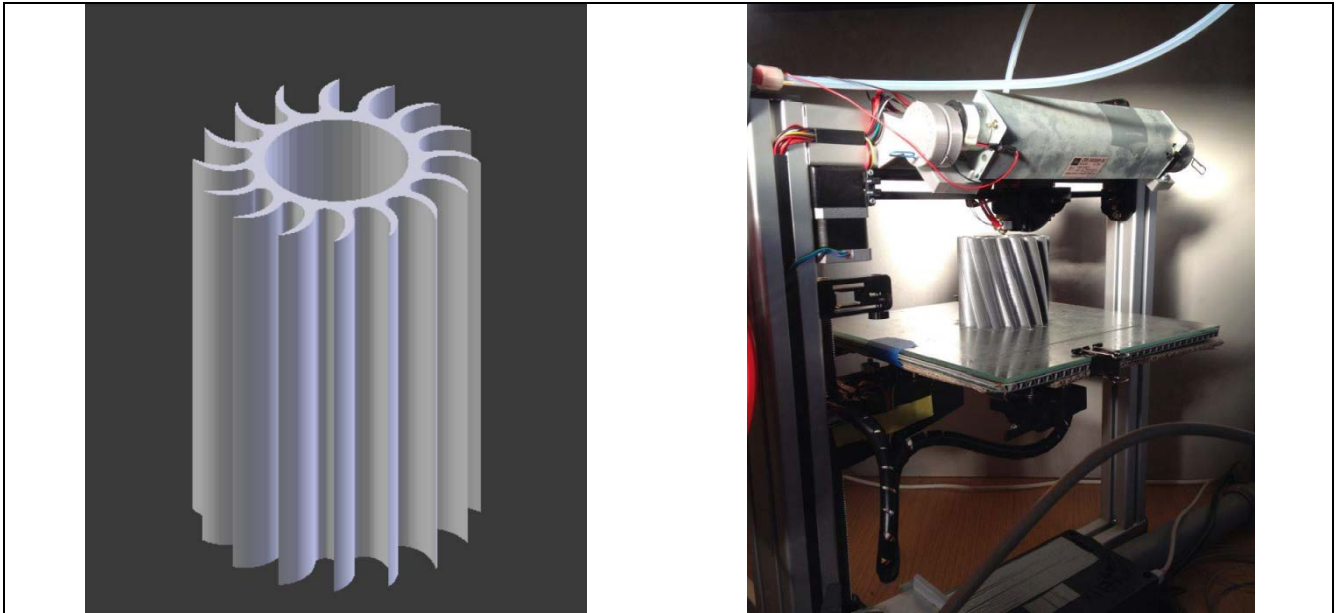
Extruded design drawing of a straight rotor (left), 3D printing of a turbine rotor with 60° twisted blades (right).
